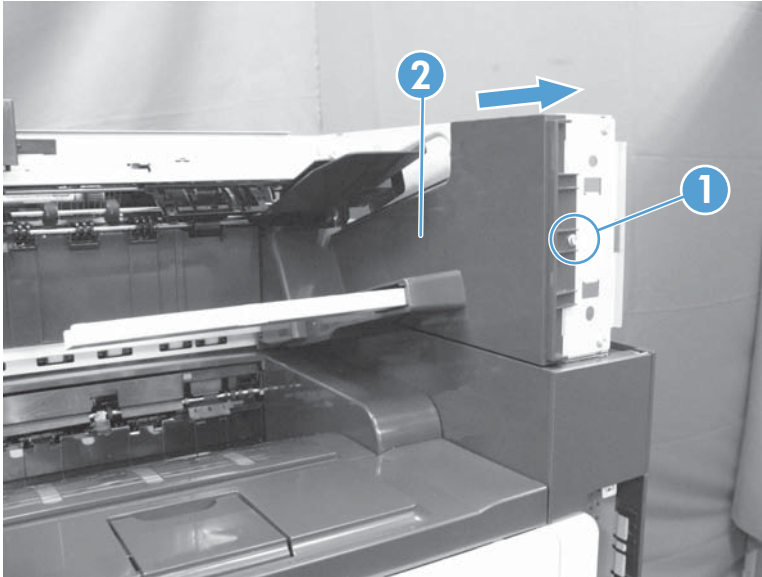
Stapler/stacker output bin assembly tab locations
